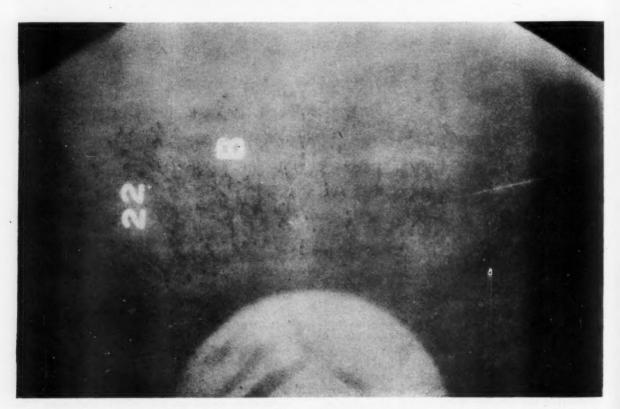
Radiograph of section of circular casting 1 in. thick, 20 in. in diam, fed with a riser 6 in. in diam.
